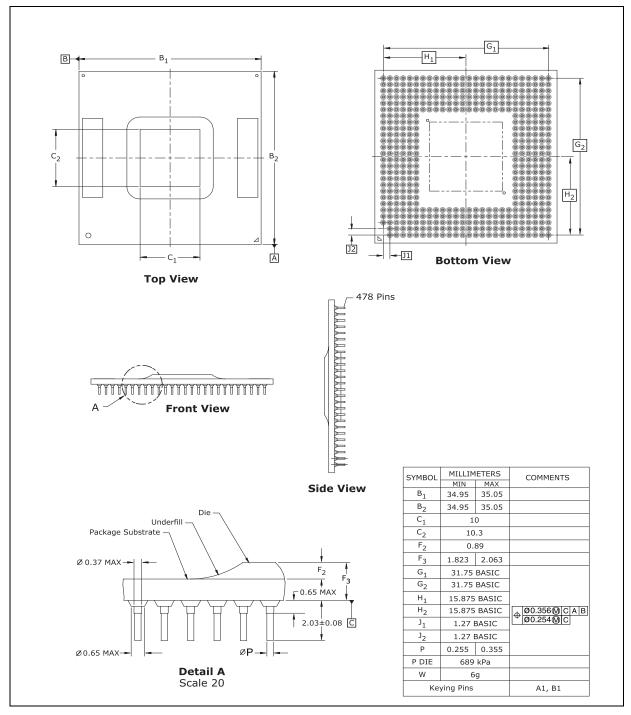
2-MB Micro-FCPGA Processor Package Drawing (Sheet 2 of 2)
